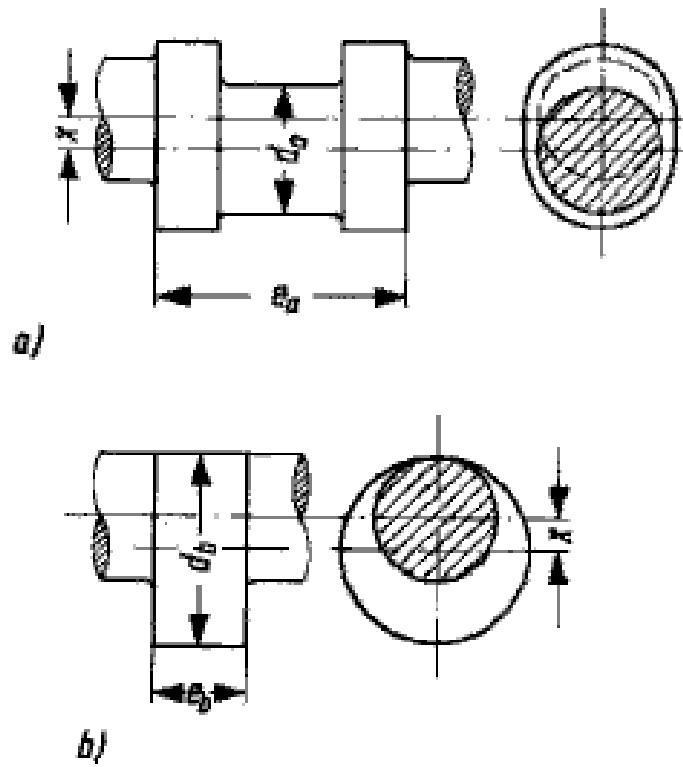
Drive shafts a) crankshaft, b) eccentric shaft (Makelt, 1961)
